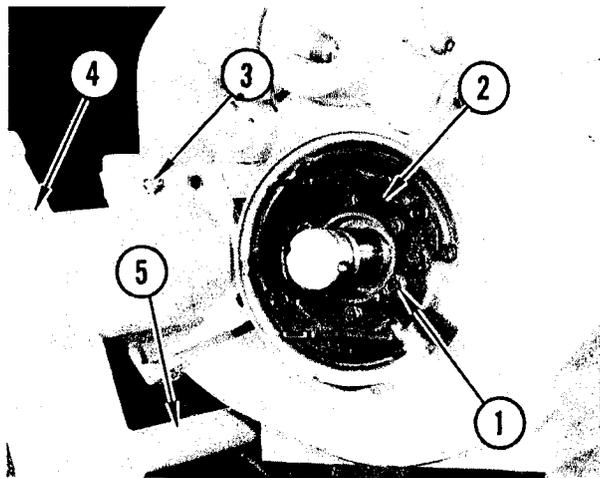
BRAKE BACKING PLATE REMOVAL
